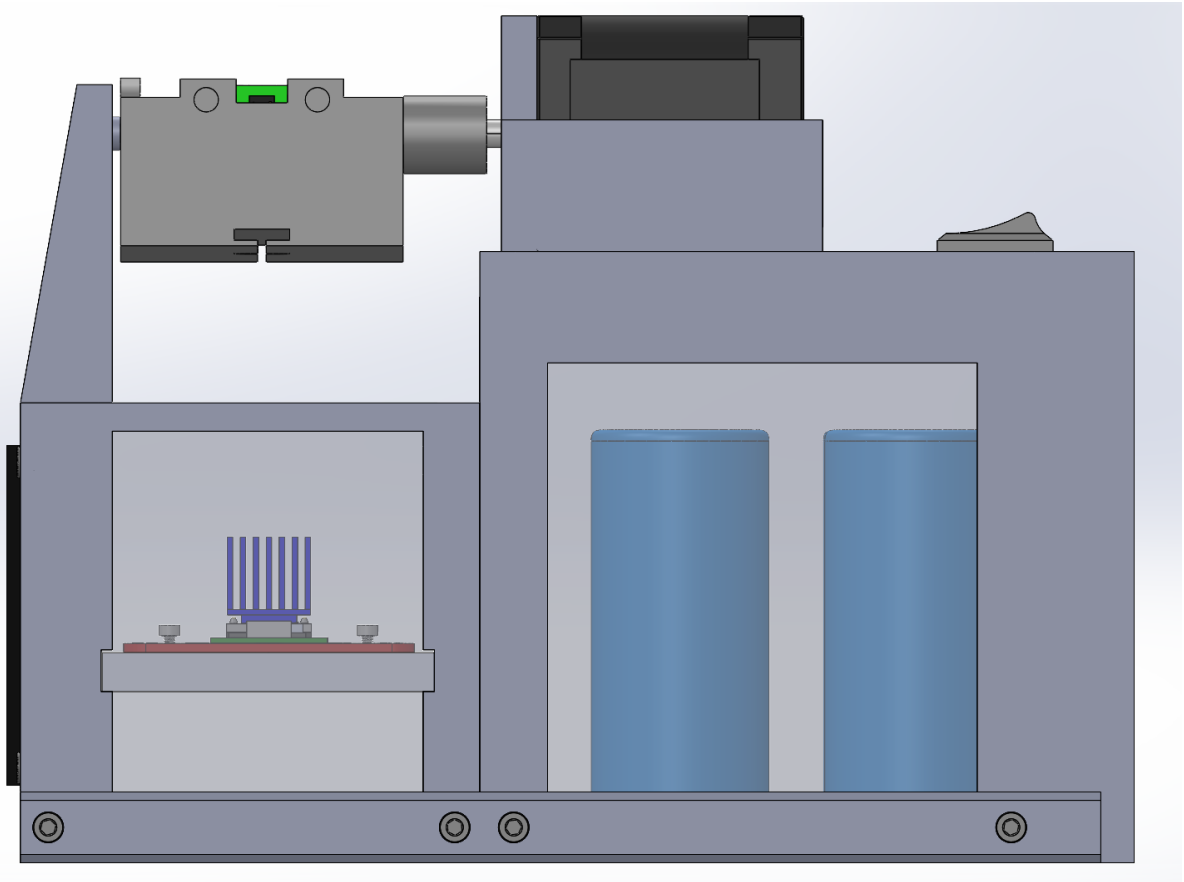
Chassis Assembly Full Side View with Sub-Assemblies Installed
